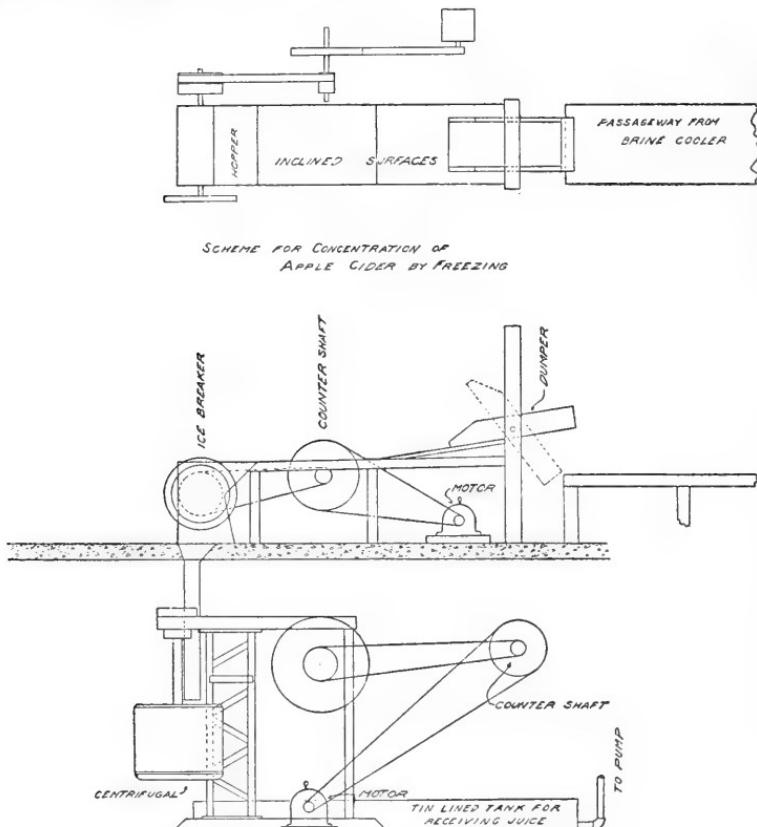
Dumper, ice breaker, and centrifugal machine used in crushing and centrifuging frozen apple juice.
